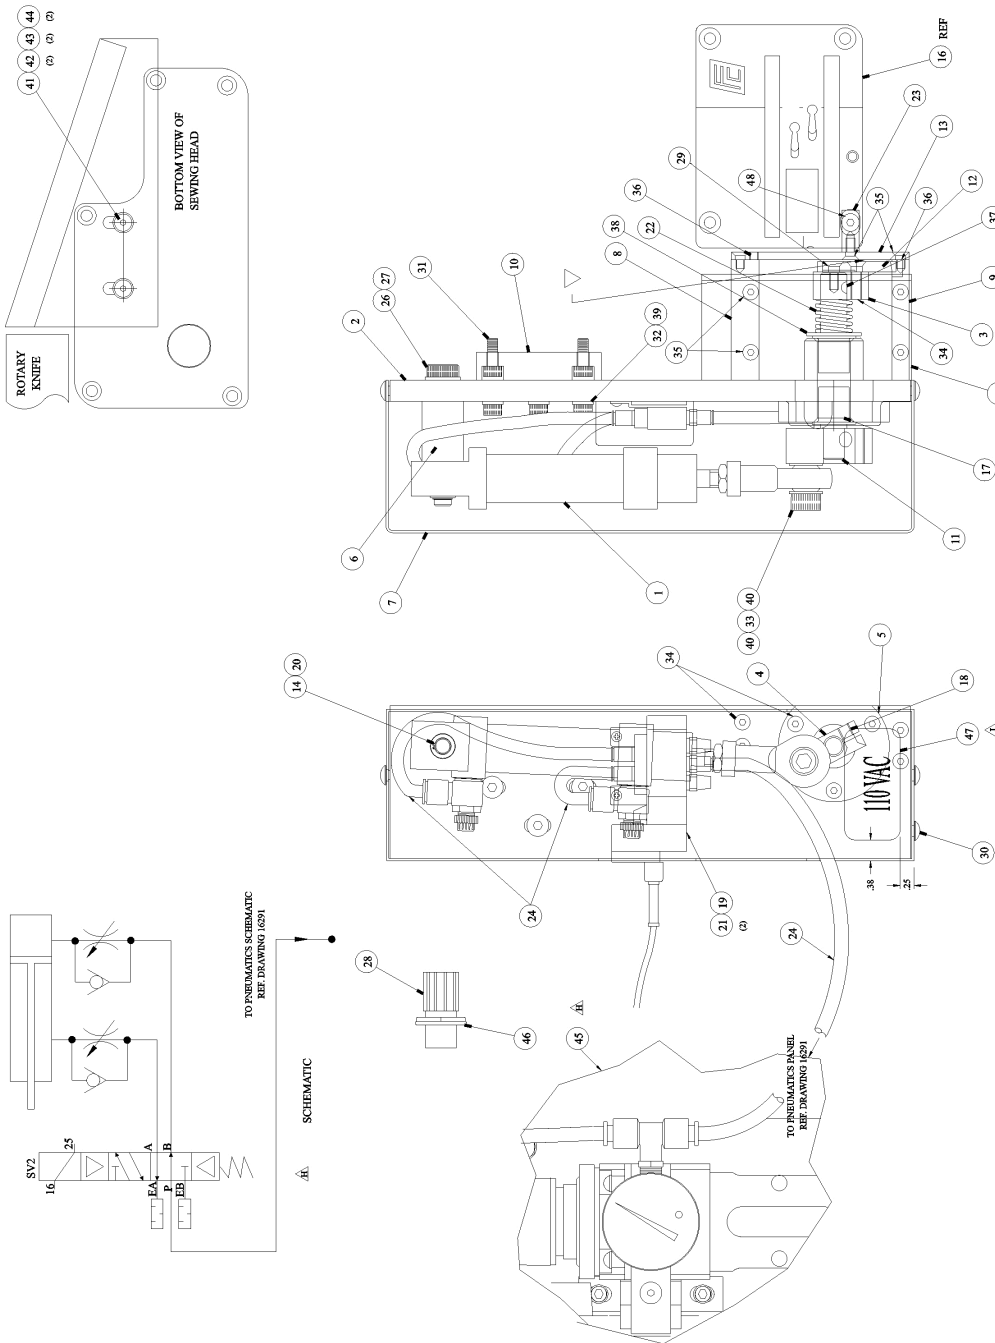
31274 Rotary Knife Assembly (110V)
